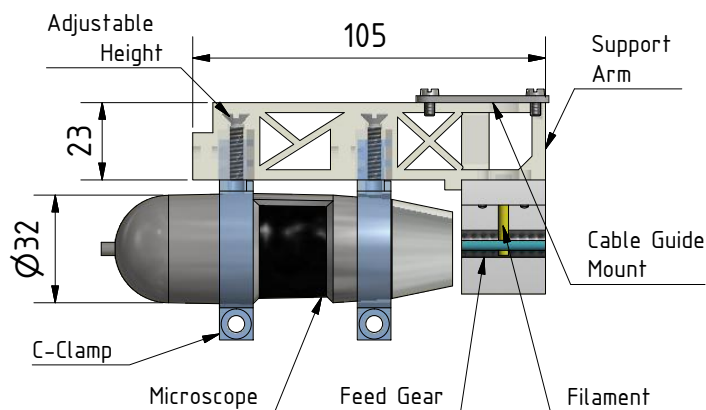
Side view of the microscope camera mount design, with height position adjustment screws.
